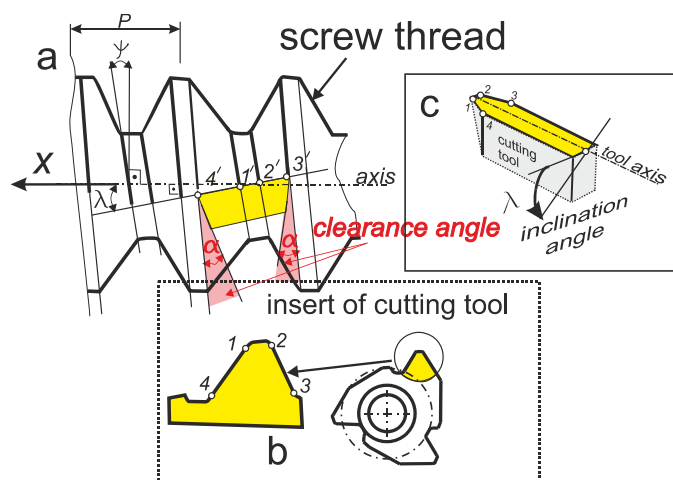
Scheme of installing the cutting insert of the thread cutter: a) at the angle of inclination of the edge λ which corresponds to the lead angle ψ ; b) placement of the cutting edge on the threaded insert; c) scheme of turning the thread cutter at an angle λ .
